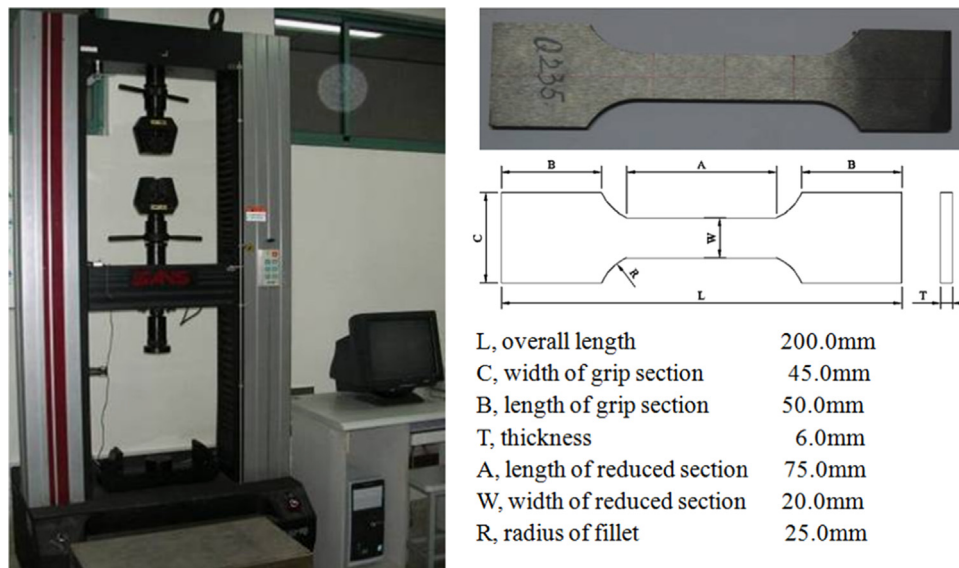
The quasi-static tensile test device and the standard dimensions of the test piece.
